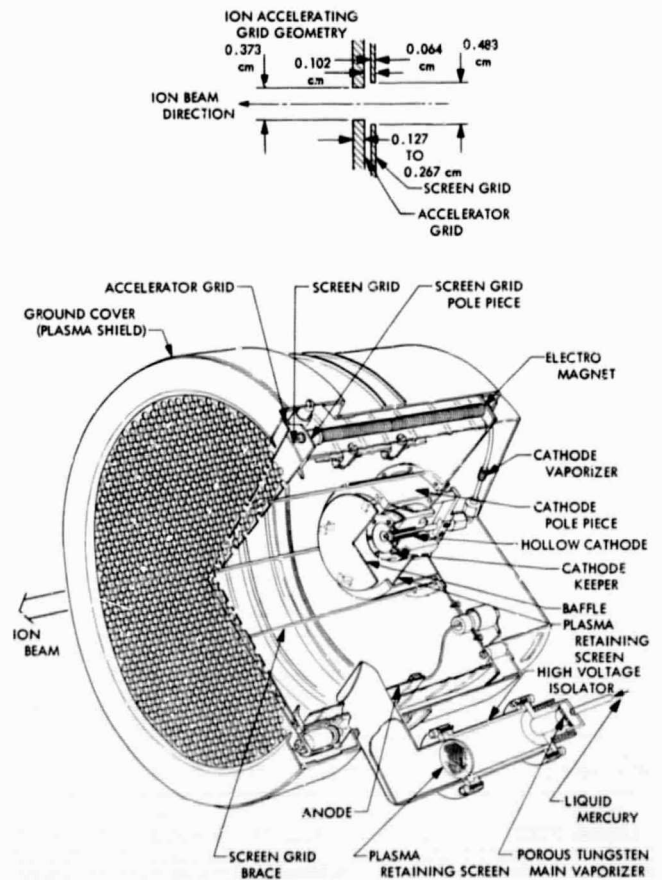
Cutaway sketch of a 20-cm diameter ion thruster
